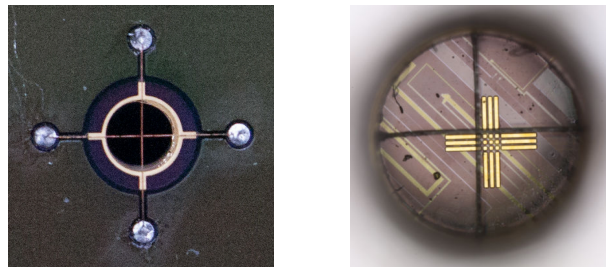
The left image shows the wires on the bottom of the MainPCB. In the right image the view through the Top Cover on the HICANN wafer is shown. The cross of the MainPCB should be above the center of the fiducial mark. The squares on the wafer are $50 \times 50 \mu\text{m}^2$.
